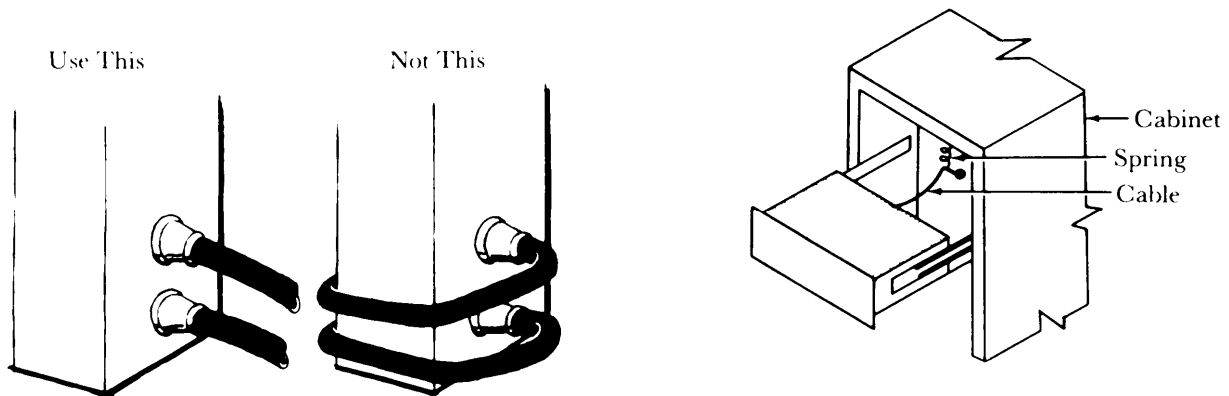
Route Cabling to Avoid Sharp Bends (Ref. 3)
